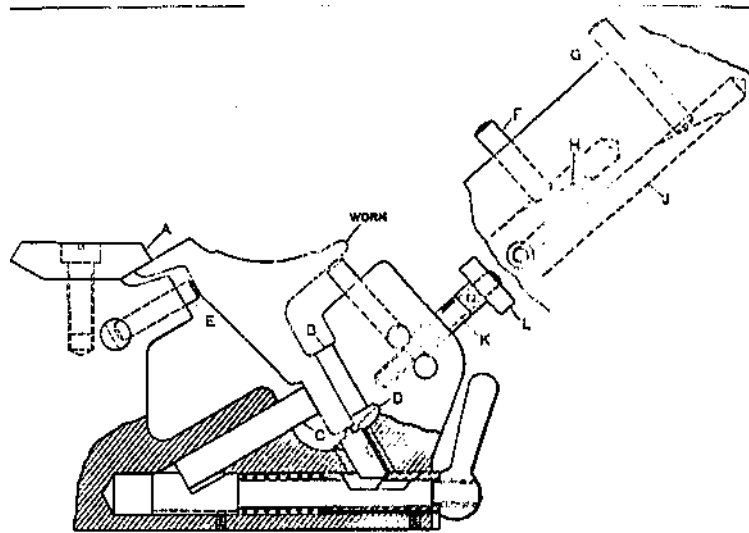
Fixture for Milling a Concave Surface provided with Sliding Supports under the Milled Surface
